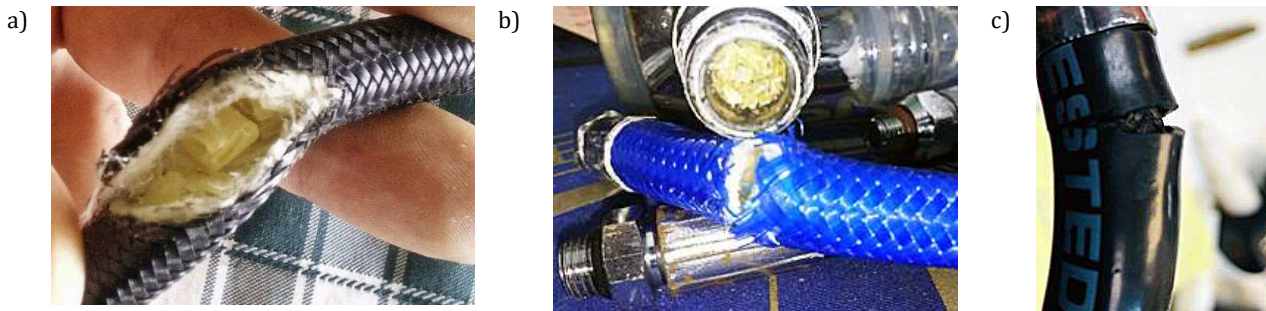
Examples of damage to flexible connections used in diving breathing apparatuses:
